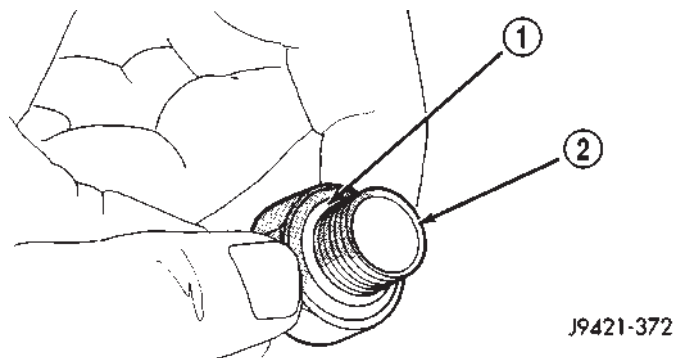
O-Ring Installation On Poppet Plunger Screw
